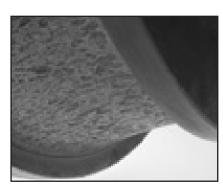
Severe peeling and spalling is shown on this spherical bearing race, also resulting from high loads.
